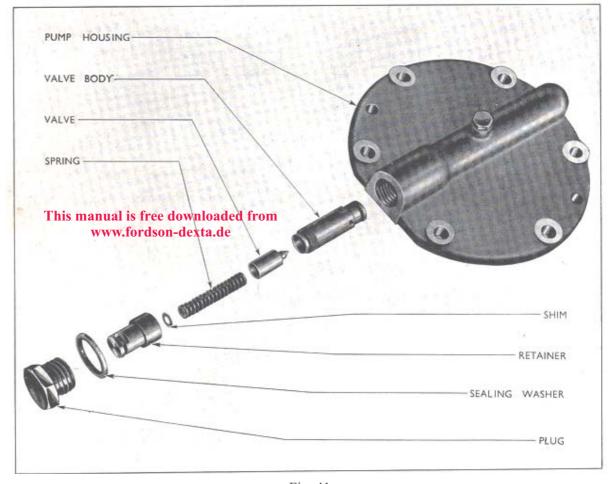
Hydraulic Pump Pressure Relief Valve Assembly
